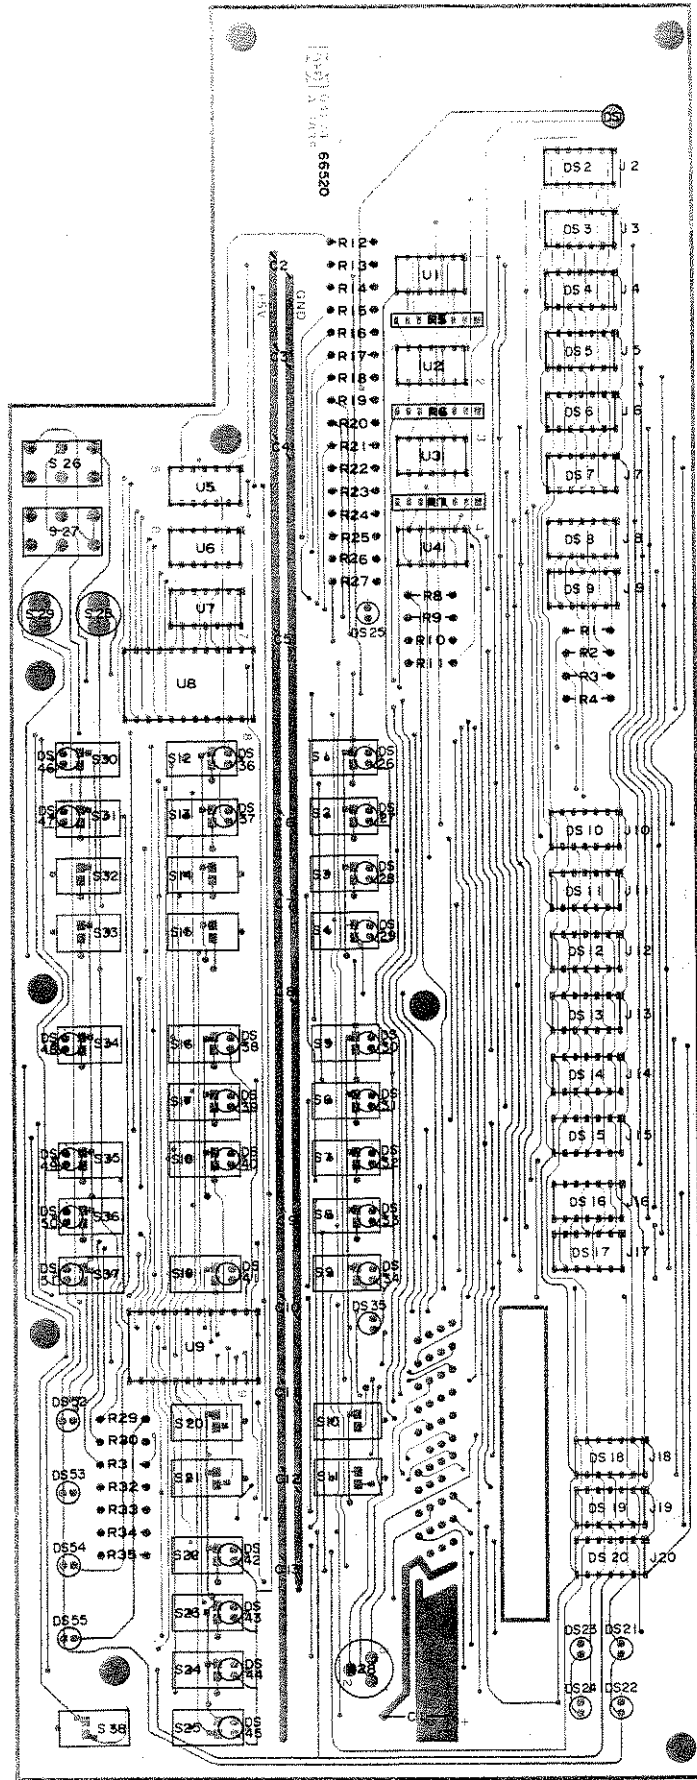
A10 Display and Keyboard Assembly Component Locations.
